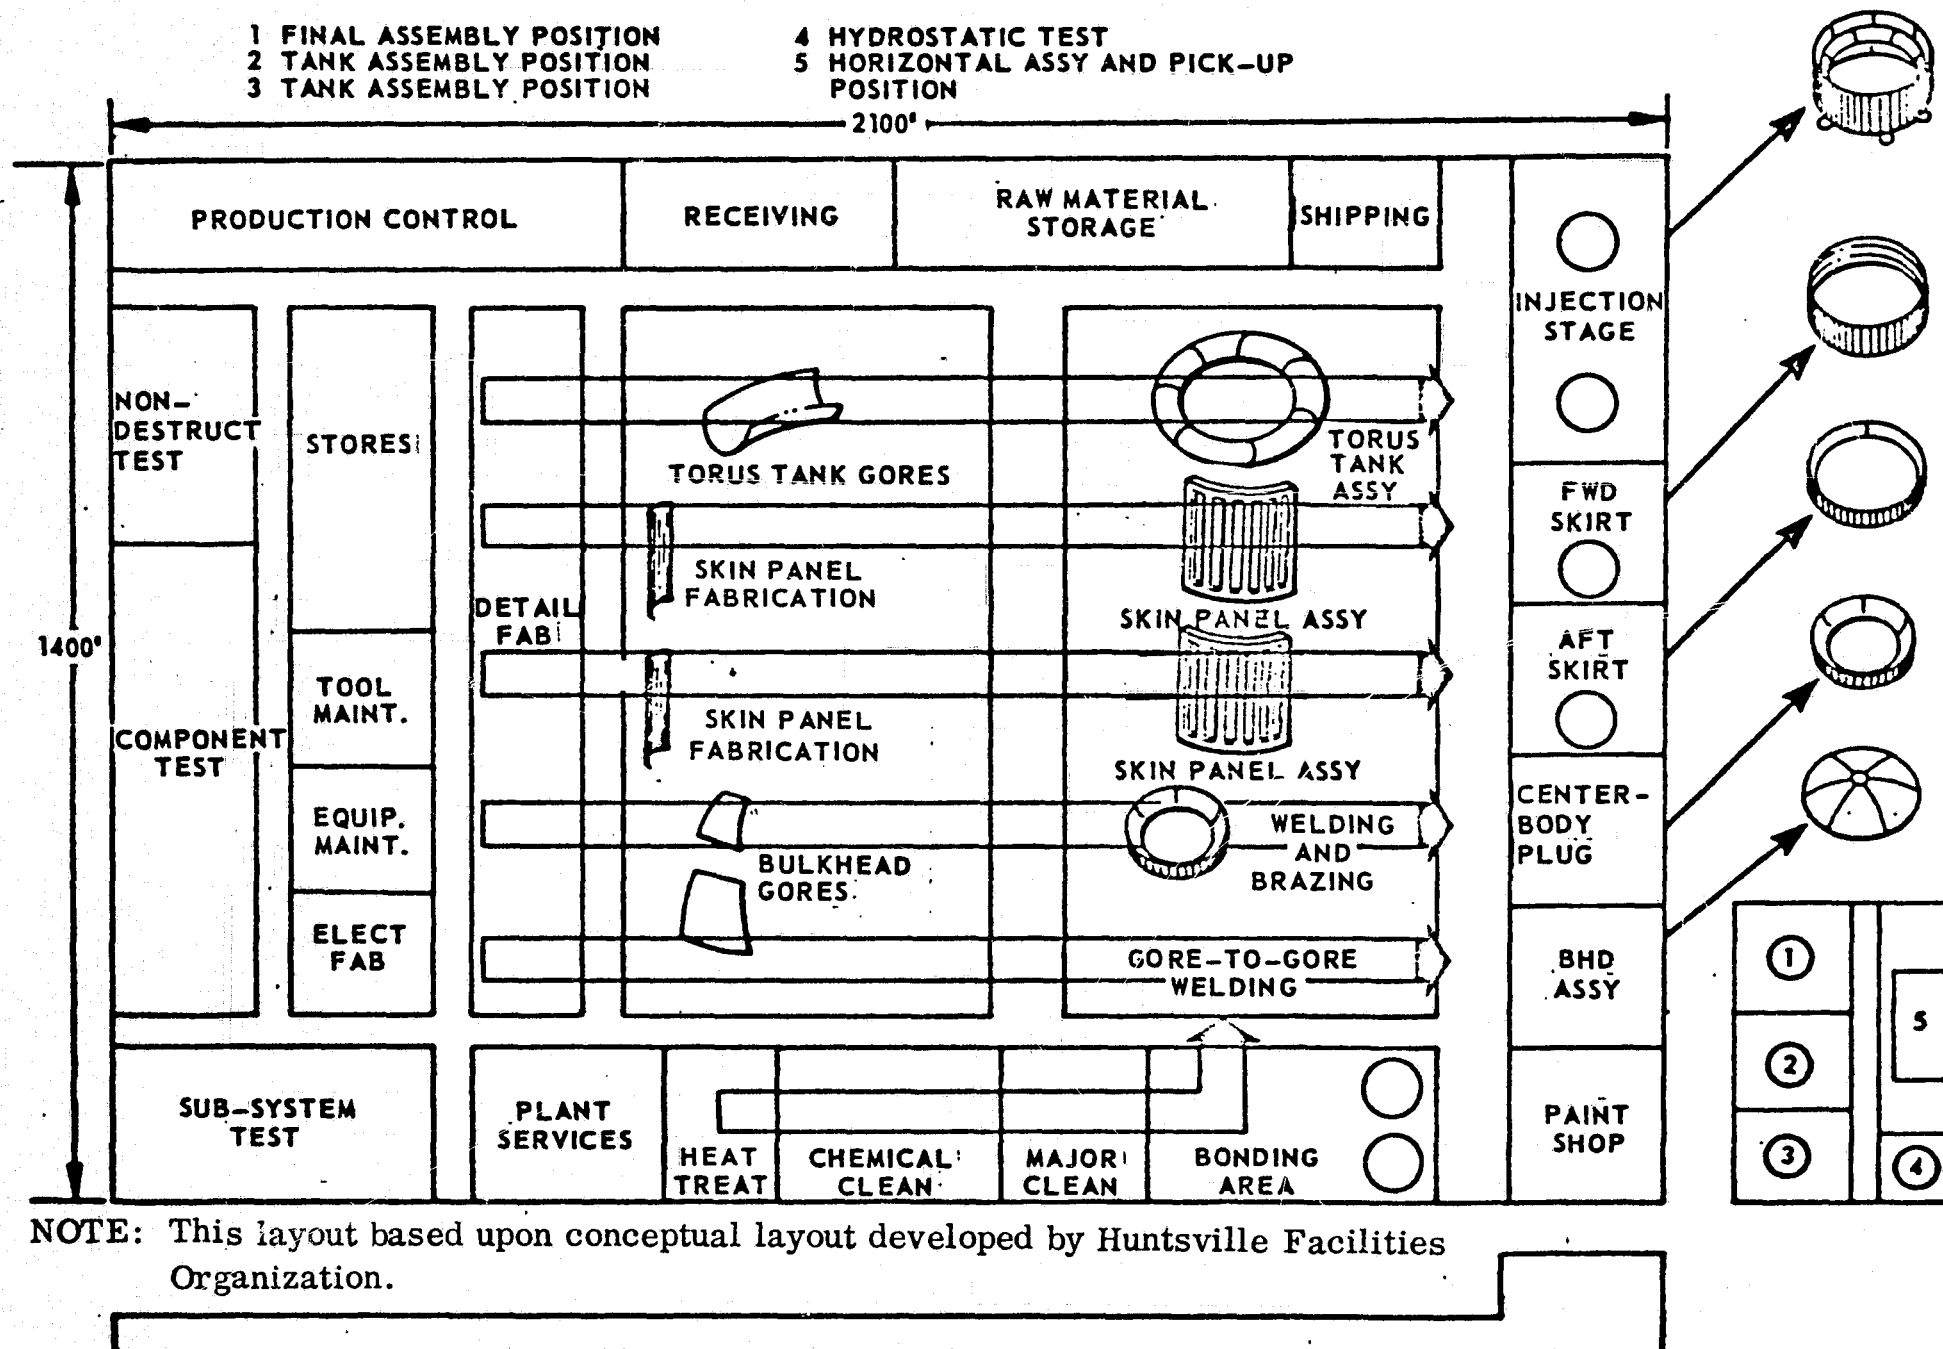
CORE AND INJECTION STAGE MANUFACTURING FACILITY
